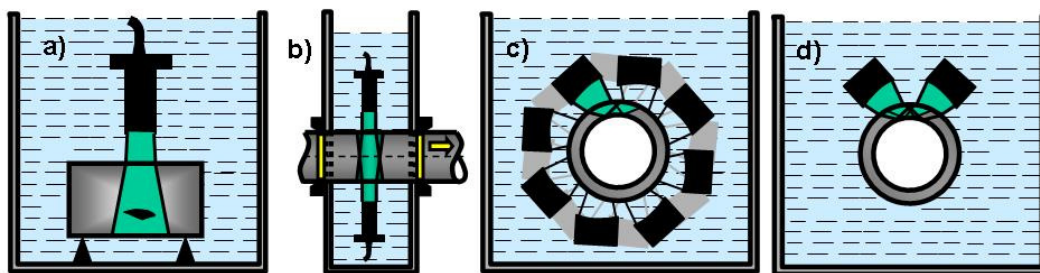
Immersion Testing. a) Immersion testing for component test, b) HRP-immersion high-speed testing for long profiles (bars & pipes), c) HRP-immersion testing of small diameter ERW-pipes with setup for seamless pipe, and d) HRP-immersion setup with probes only for weld inspection in 12 o'clock position.
